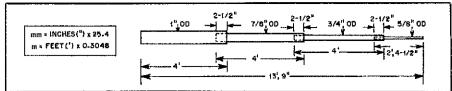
Details of the antenna-arm construction. No. 6 machine screws are used to hold the tubing together.
